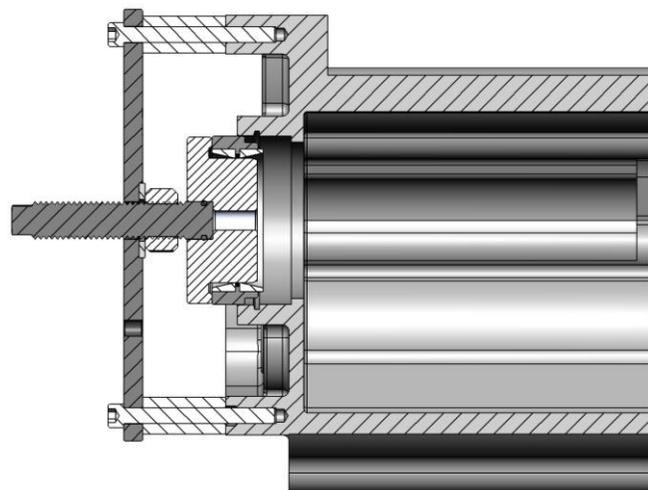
| TAPERED BEARING ADAPTER WITH TOOLE-GB APPLYING FORCE FROM LEFT TO RIGHT
